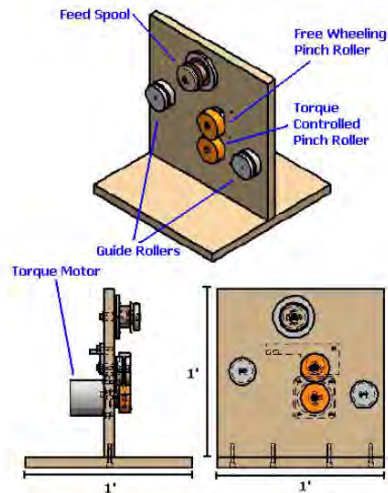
Wire feed mechanism. Clockwise from top: 3-D view, front view, and side view.
